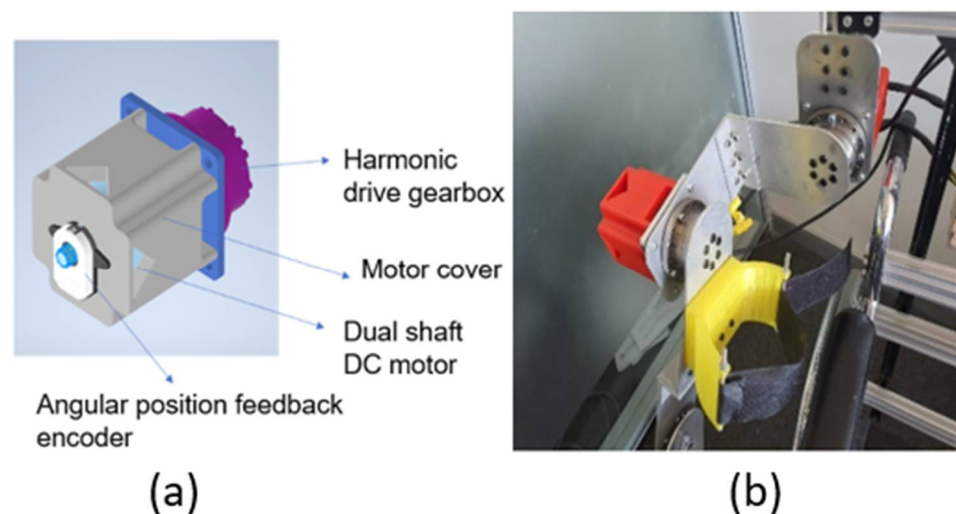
Actuator module unit for SAMA shoulder rotations. The CAD design is shown on the left (a), while the whole actuator module assembly is shown on the right (b).
